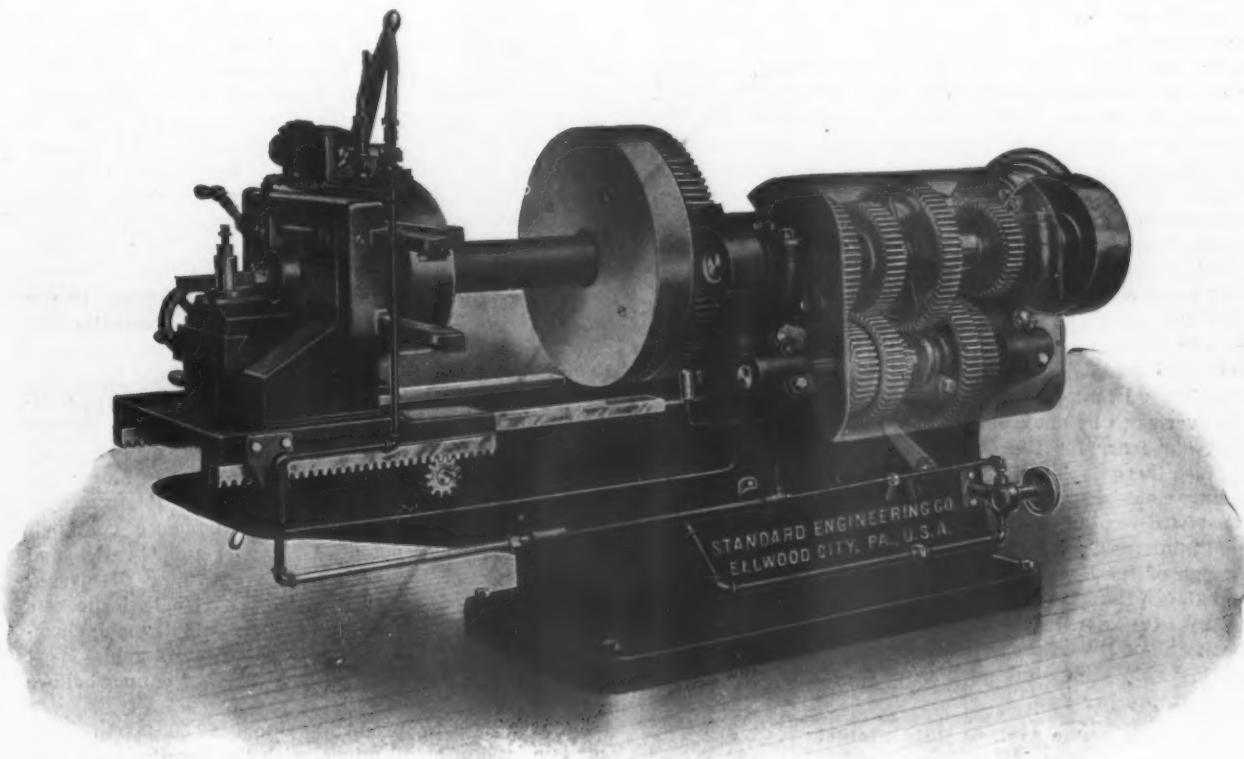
Rear View. Showing Cutting Off Tool Removing the Burr from the Cut End of a Pipe.
